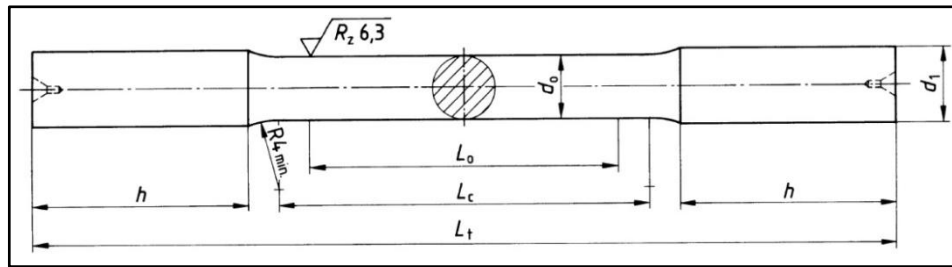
Drawing of tensile test bar in DIN 50125 [DIN91]
